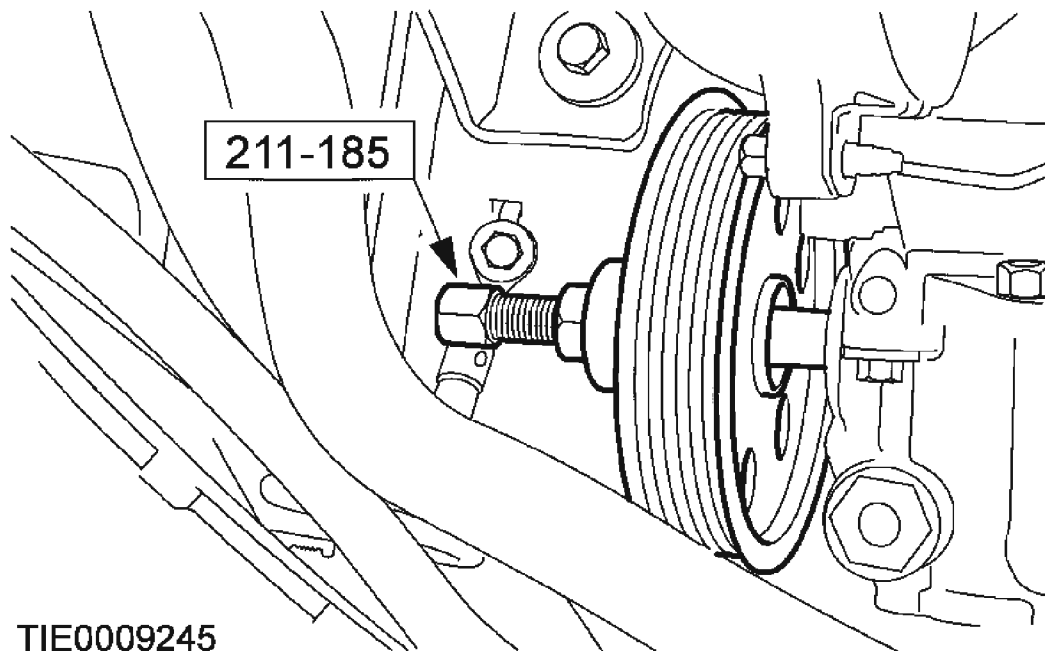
Using Special Tool To Install Power Steering Pump Pulley
